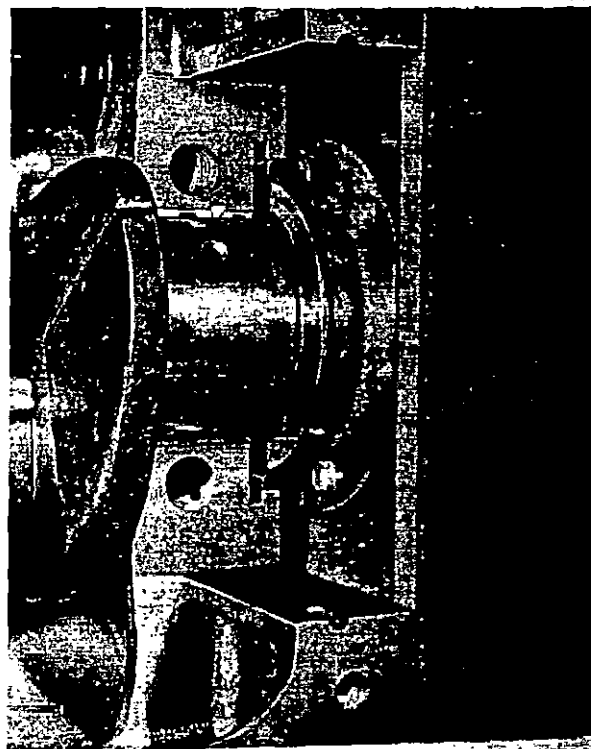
Rear Bearing Filler Block & Bearing Cap Removed Showing Position of Seal in Place on HD-260 & JD-382
